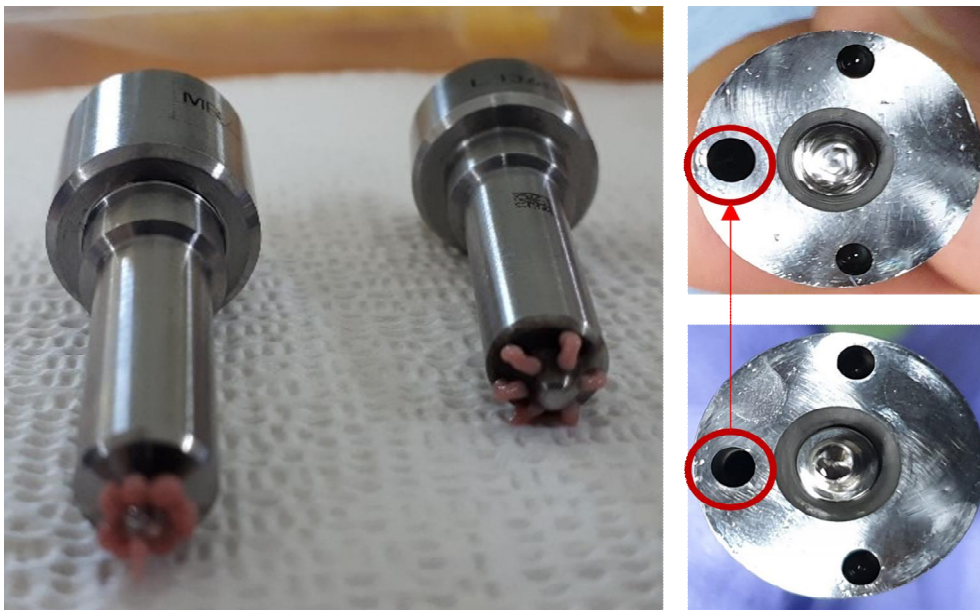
Nozzle hole of injector and oil feed hole of nozzle
